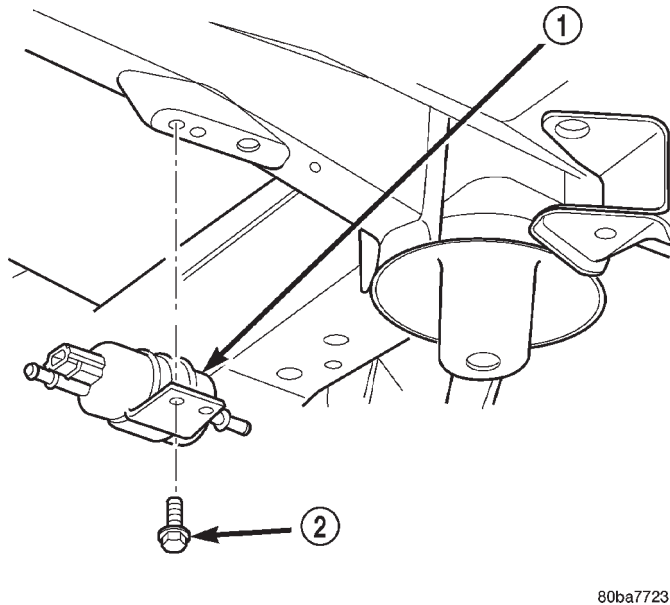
Fuel Filter/Fuel Pressure Regulator Removal/Installation
